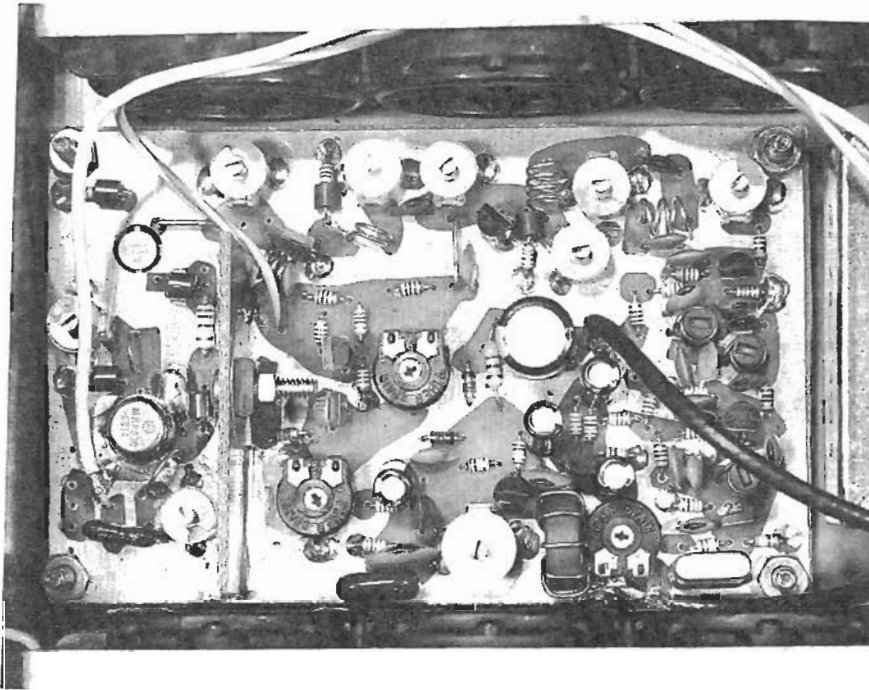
THE FINISHED PC BOARD has a neat, clean appearance. Sloppy workmanship can not be tolerated on this circuit layout.
